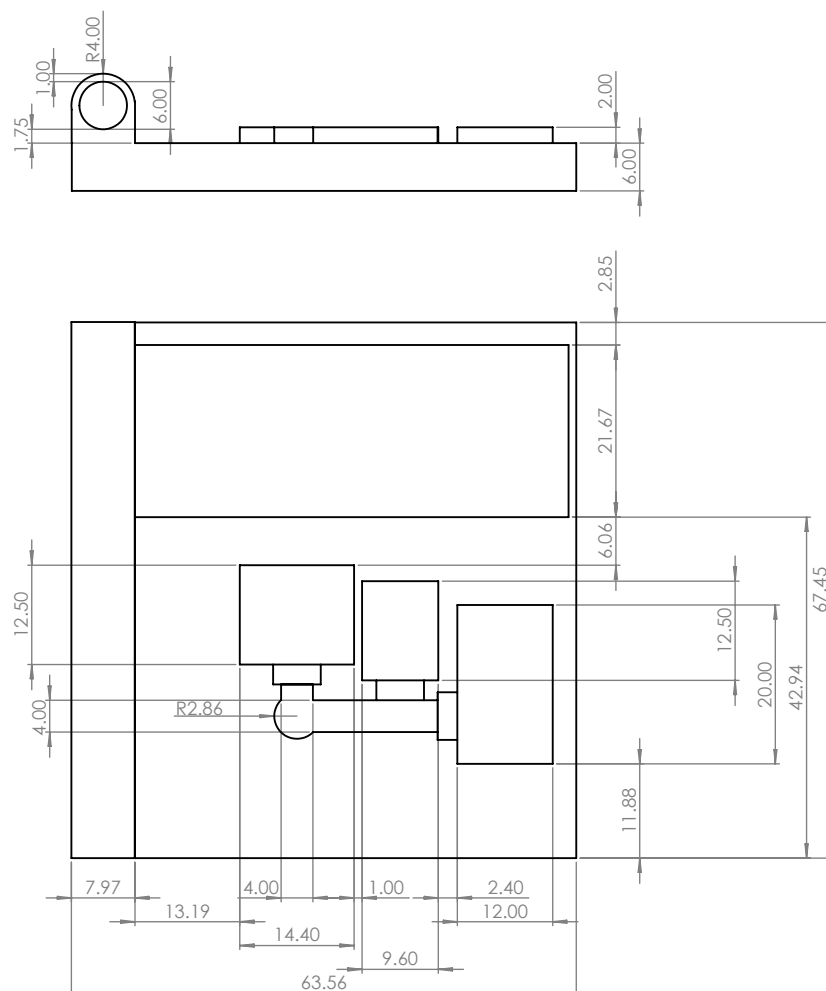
Dimensions of the right page of the folding card device for viral protein detection. The right page of the folding card device was 3D-printed. All dimensions are shown in millimeters (R: radius).
